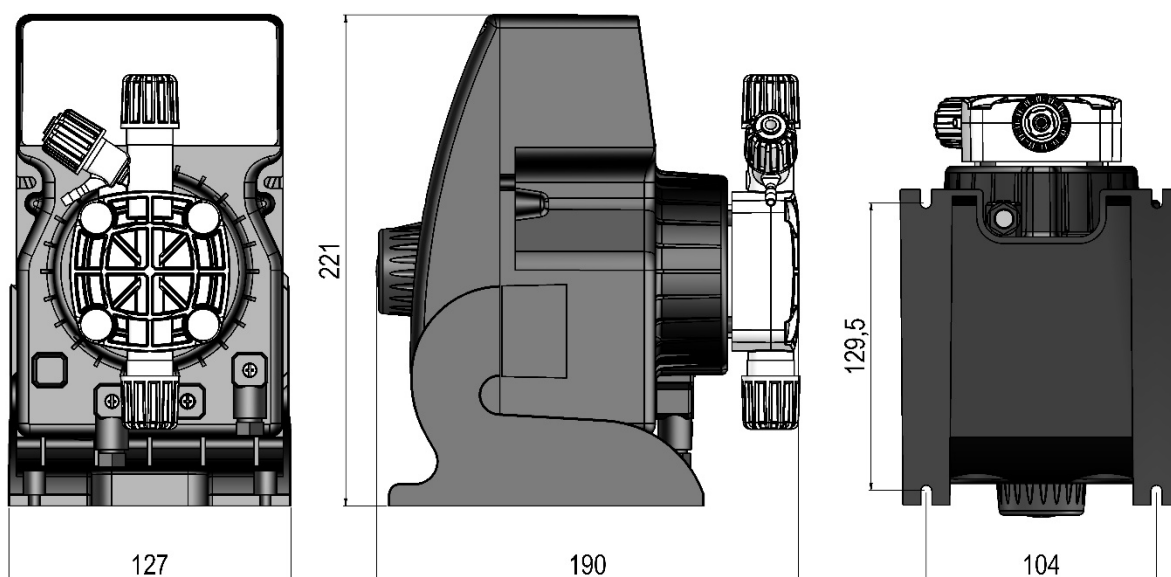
PBM pump, base-mounted with stroke adjustment (dimensions given in mm).
